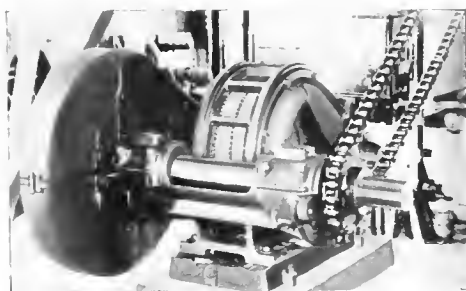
Back-gear Motor and Chain Drive for a Counter-shaft Belted to Two Masecuite Pumps, Four Molasses Pumps and a Screw Conveyor
